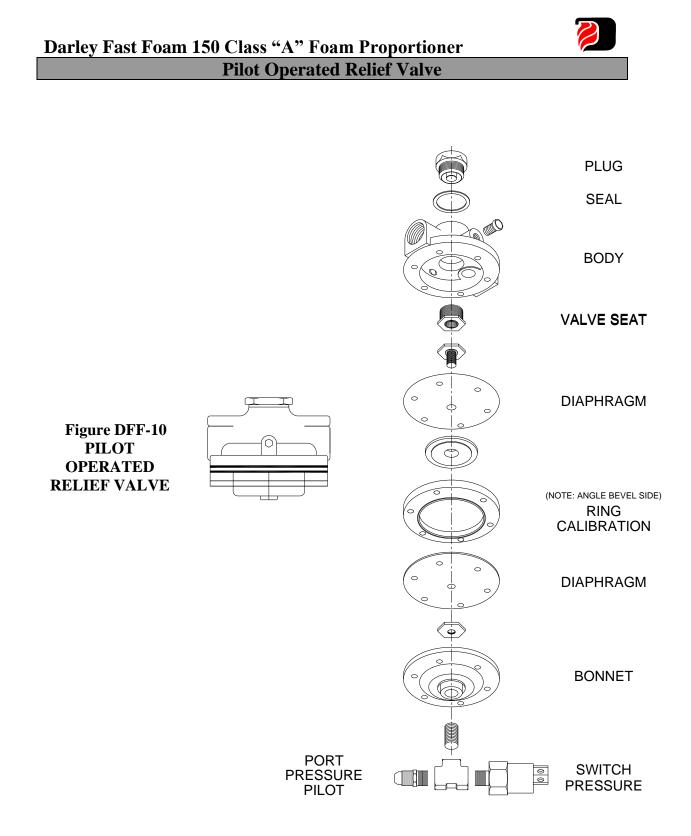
PILOT OPERATED RELIEF VALFE (EXPLODED
